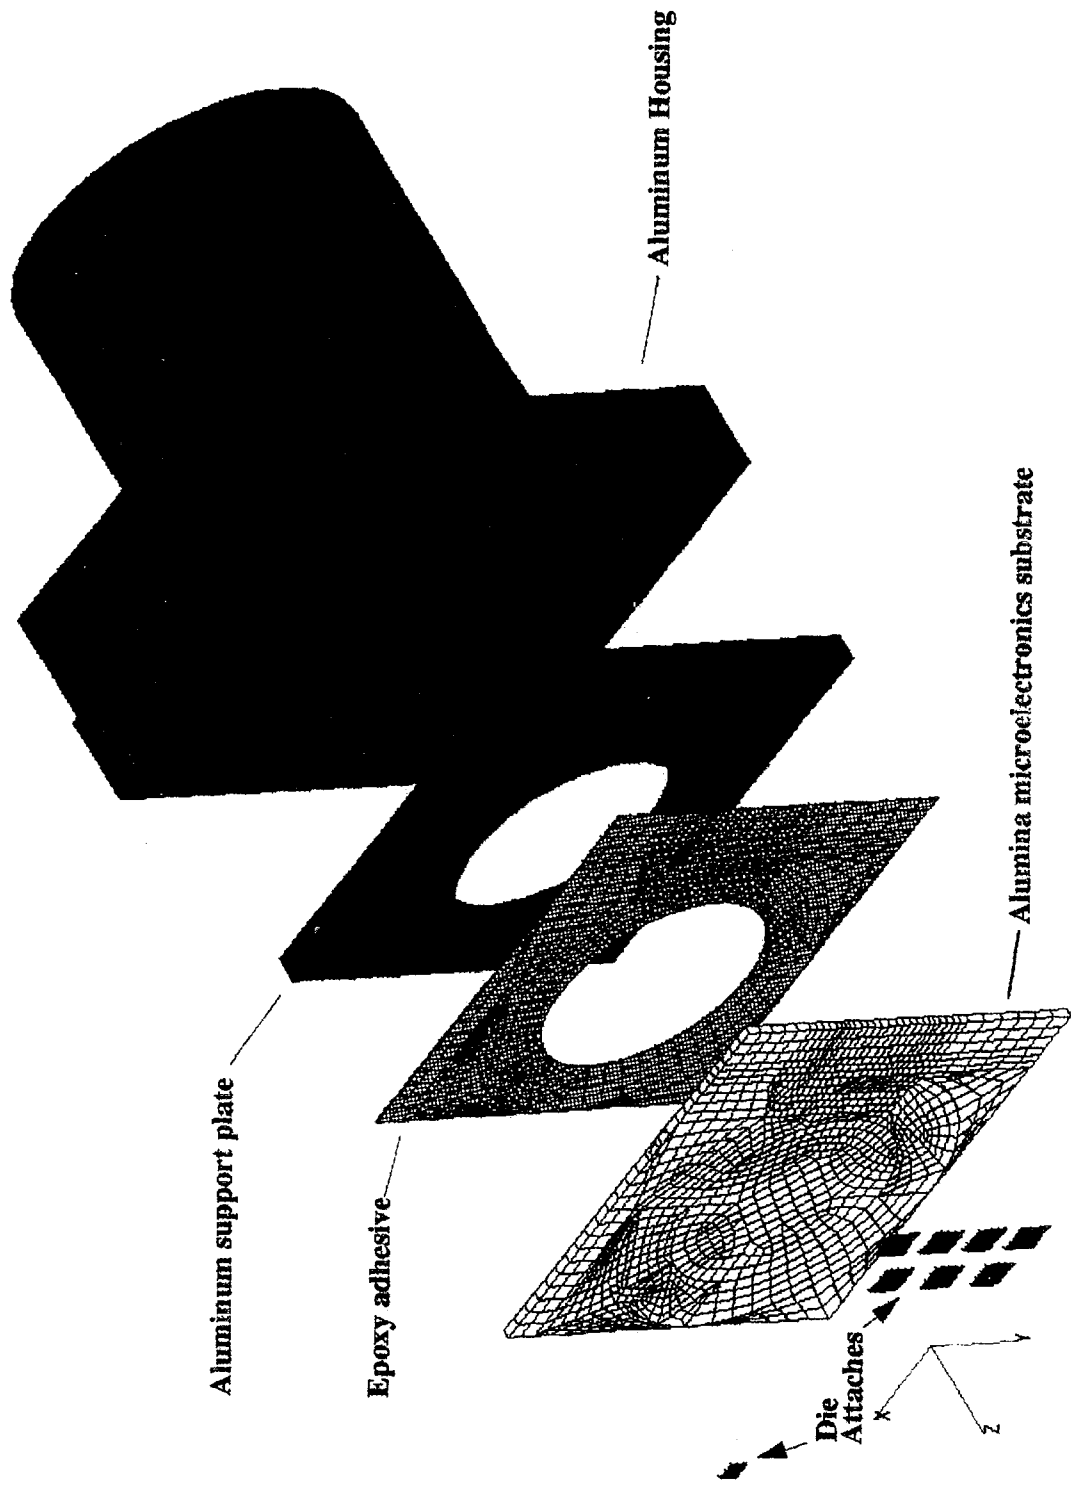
Exploded View of the Electronics Assembly Showing Where it Fits into the Actuator Housing
